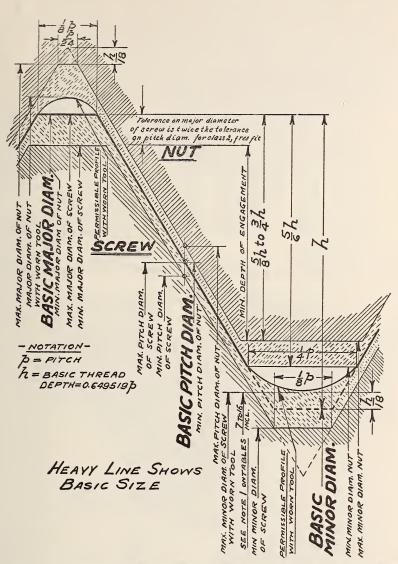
Illustration of tolerances and crest clearances for class 3, medium fit.
